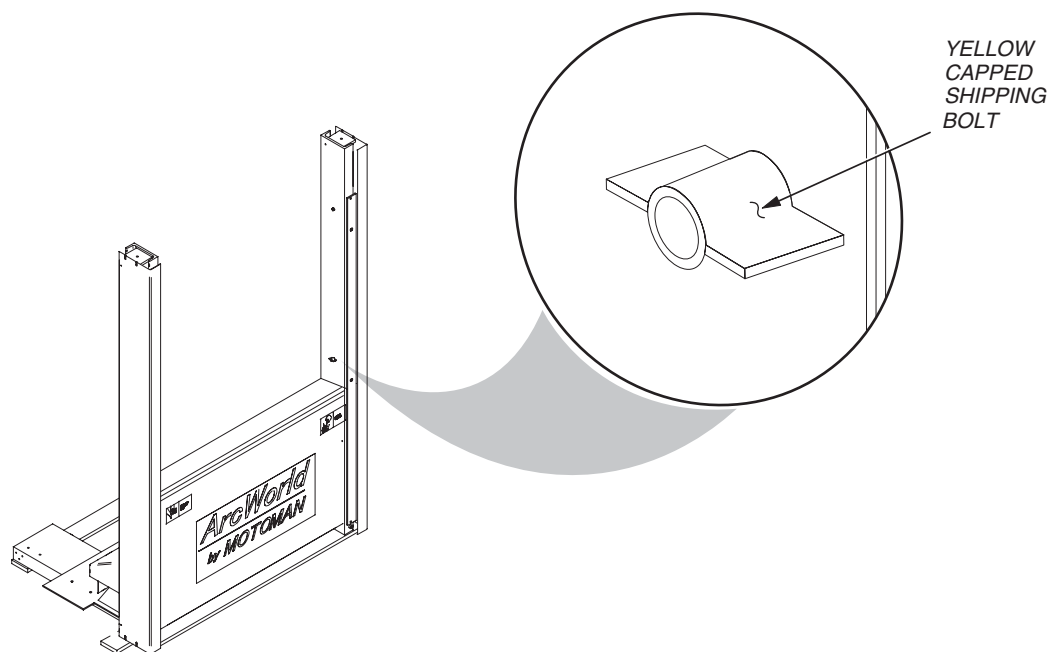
Location of Positioner Shipping/Alignment Bolts
